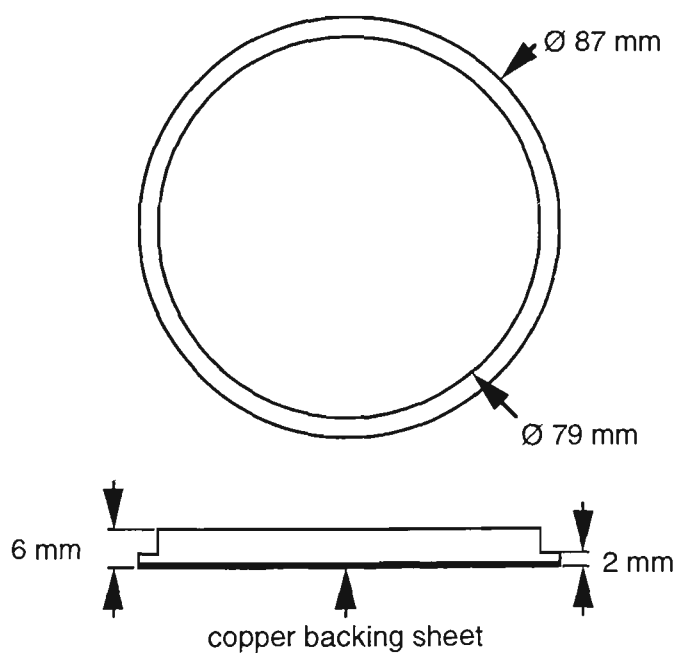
Dimensions of machined monolithic targets. The copper backing sheet is shown attached to the rear side of the target, and was approximately 1mm in thickness. The outer 10mm of the copper sheet were given a high quality finish to provide a good O-ring seal.
